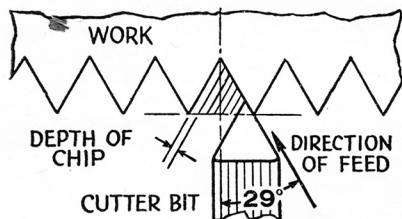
Action of thread-cutting tool when compound rest is set at 29-degree angle.
